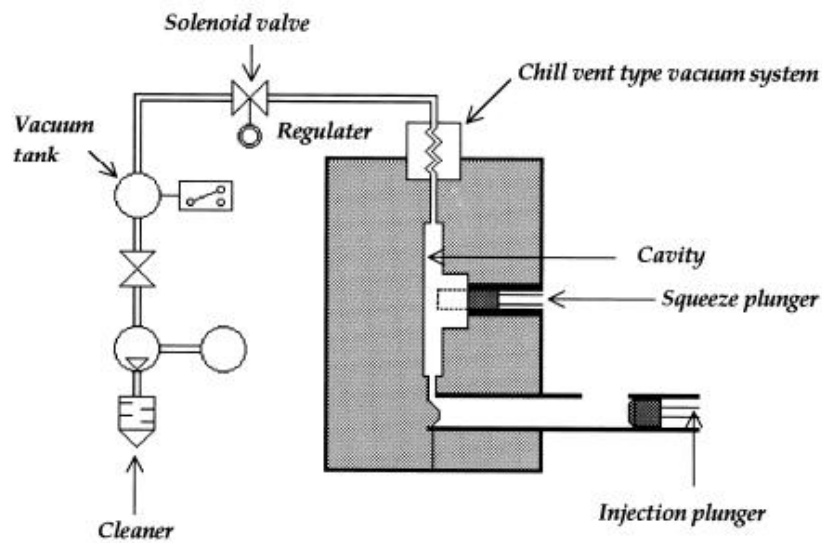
Schematic representation of Vacuum Die casting-[23]
